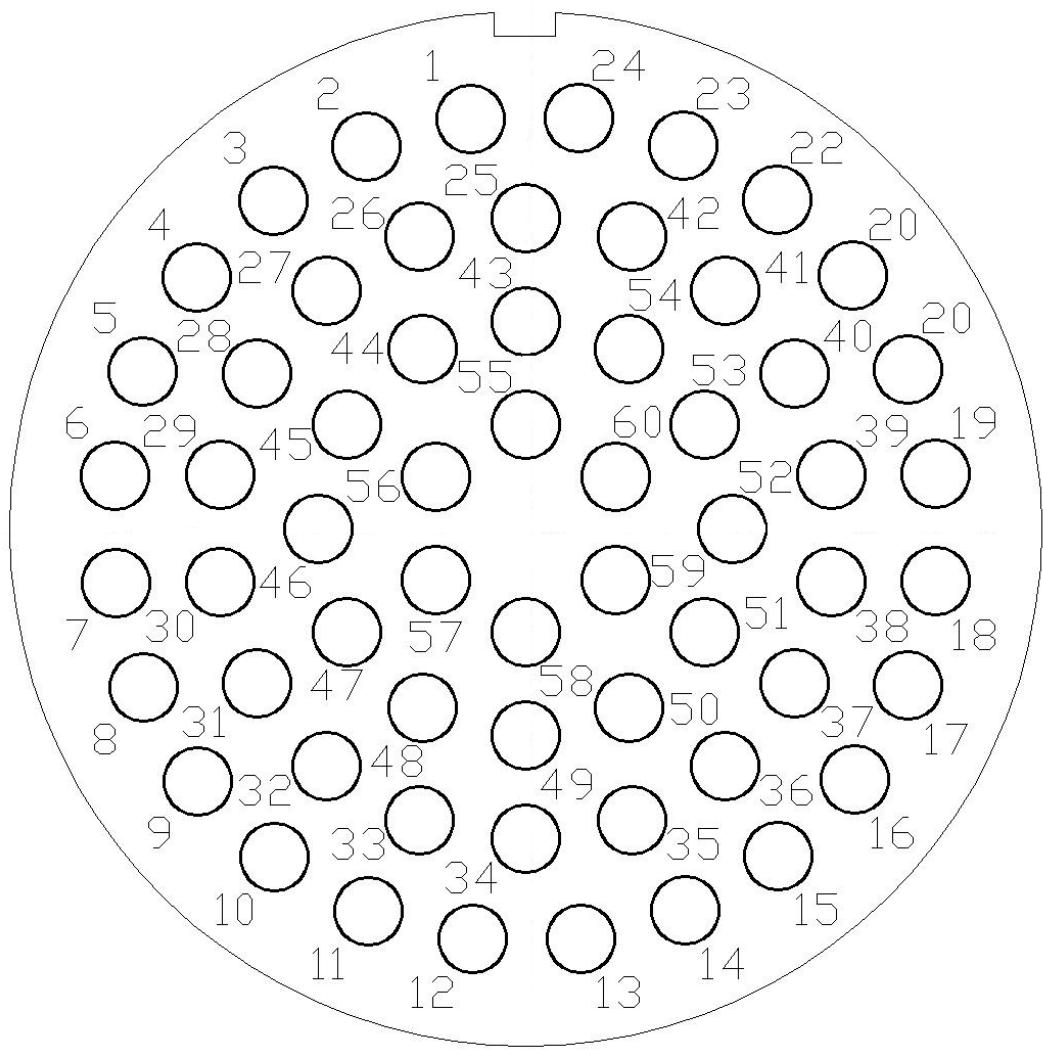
Inverter Box CN6 Connector Layout Drawing
